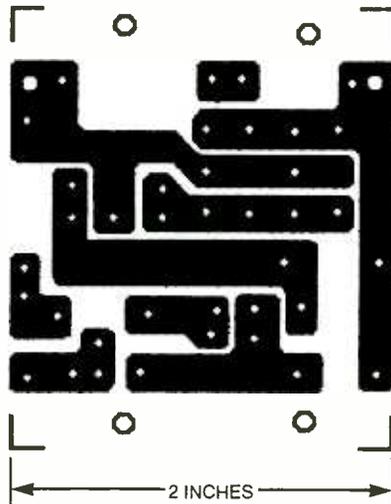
This is a full-size foil pattern for the Lighting System PC board.
